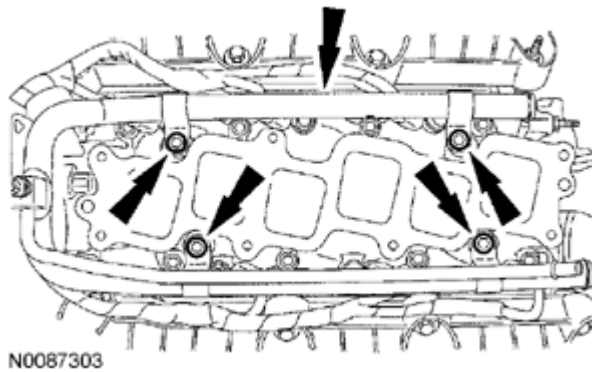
Locating Fuel Rail And Injectors Assembly Bolts
